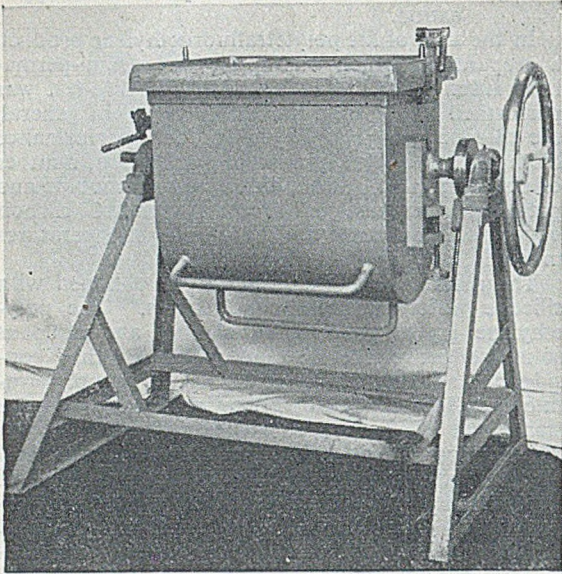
Roll-over Machine, size 18 by 22 in.
